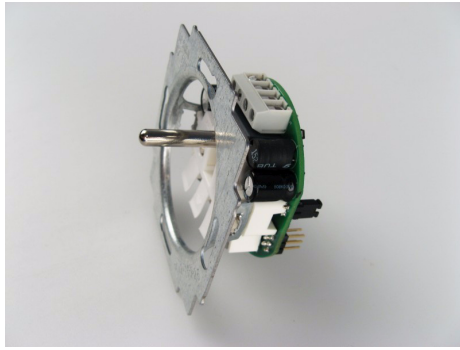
Intelligent Outlet Board Connected with Outlet Socket Chassis
